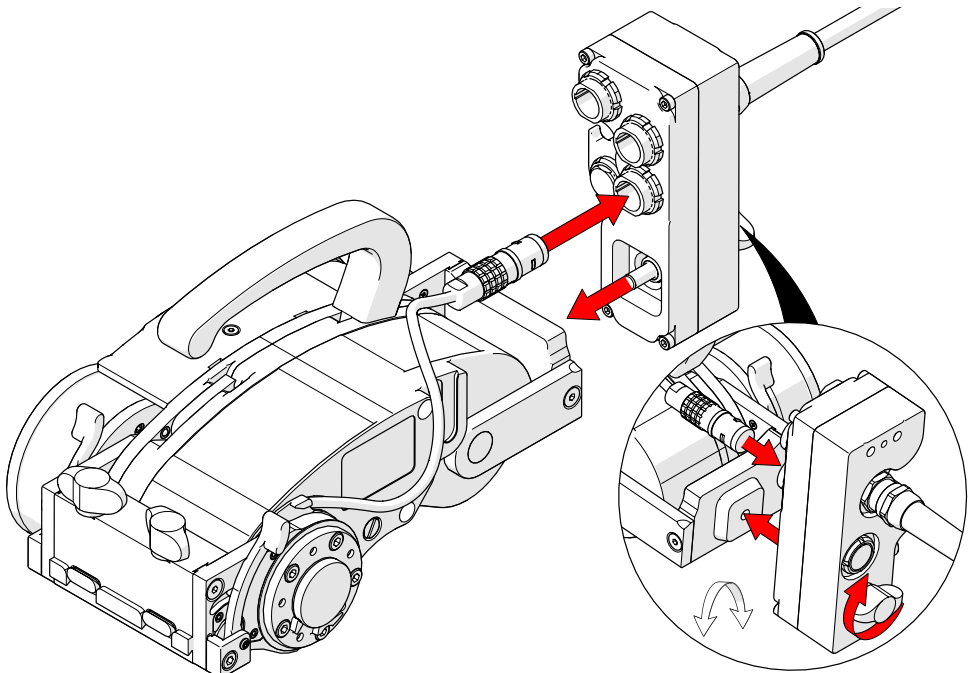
Mount the umbilical at 90° from standard mounting angle
